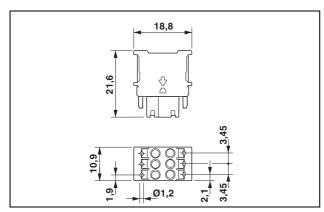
Dimensions of connector HSCP-SP 1,5-1U6-7035
